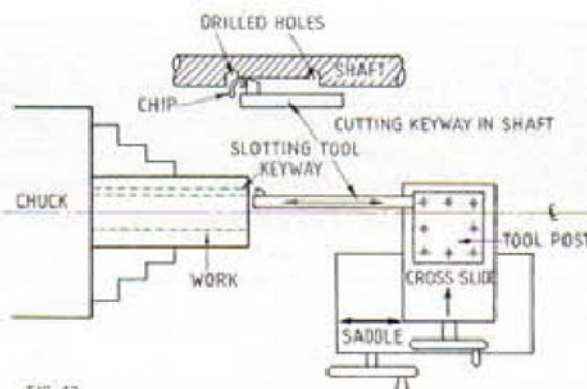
FORMING A KEYWAY IN LATHE WITHOUT SLOTTING ATTACHMENT
